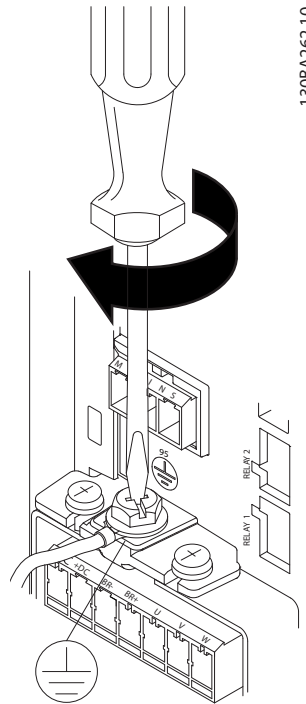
When mounting cables, first mount and tighten ground cable.
